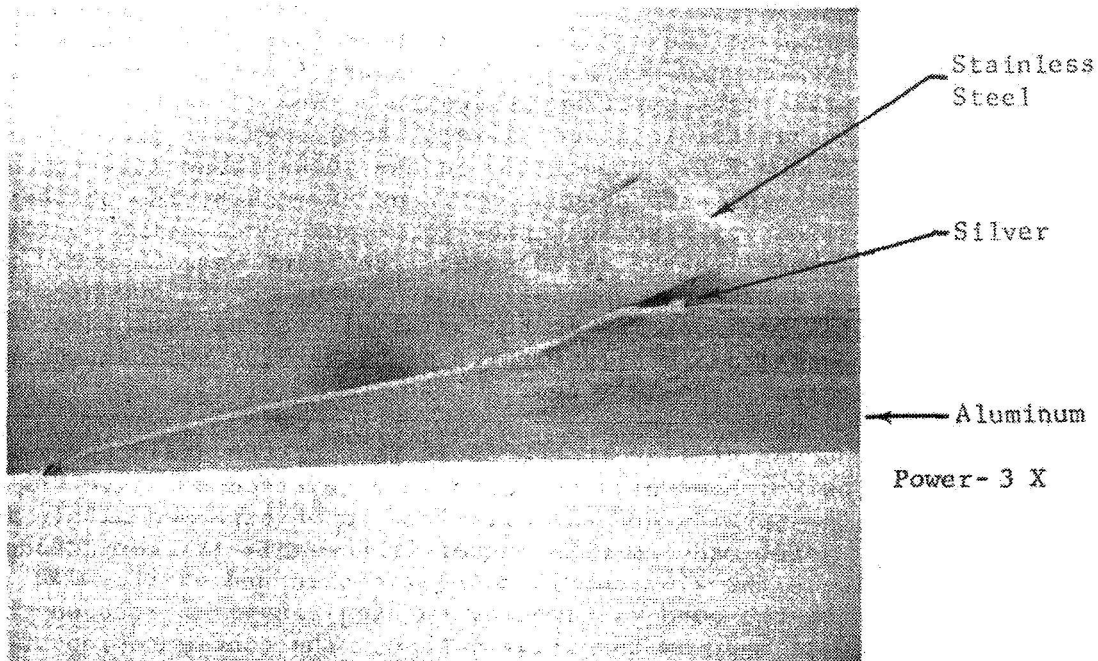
Section of Explosive Welded 304L Stainless Steel to 2219-T851 Aluminum
